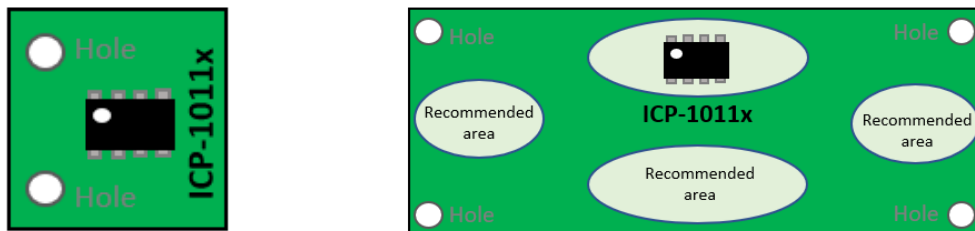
Improper (left) and proper (right) placement of pressure sensor relative to mounting holes
